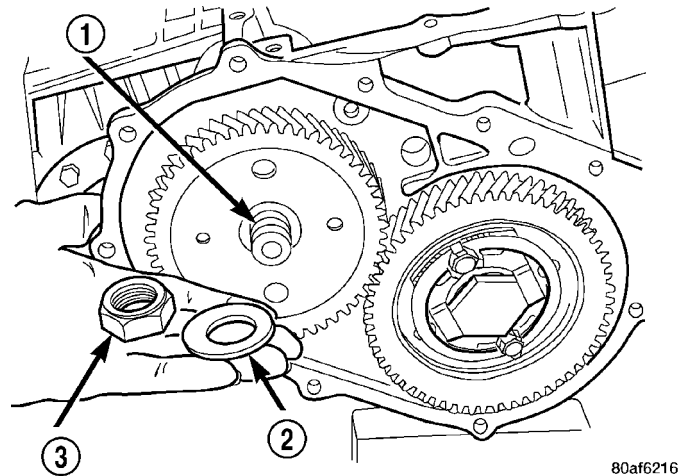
Transfer Shaft Gear Nut and Coned Washer
